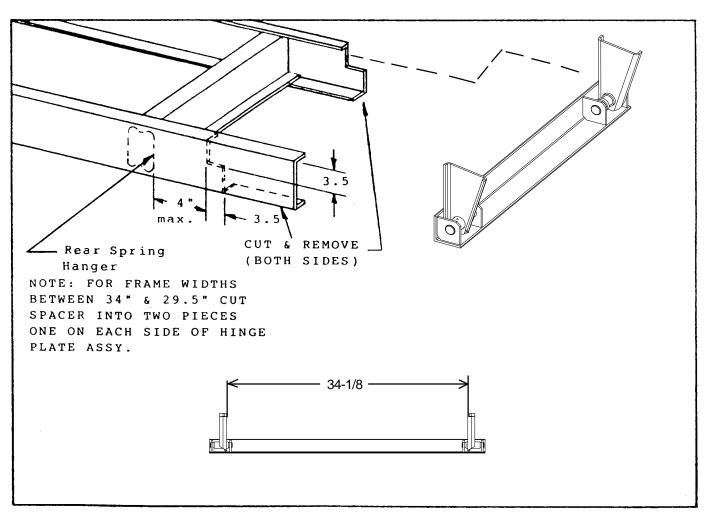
FRAME MODIFICATION AND REAR HINGE ATTACHMENT
